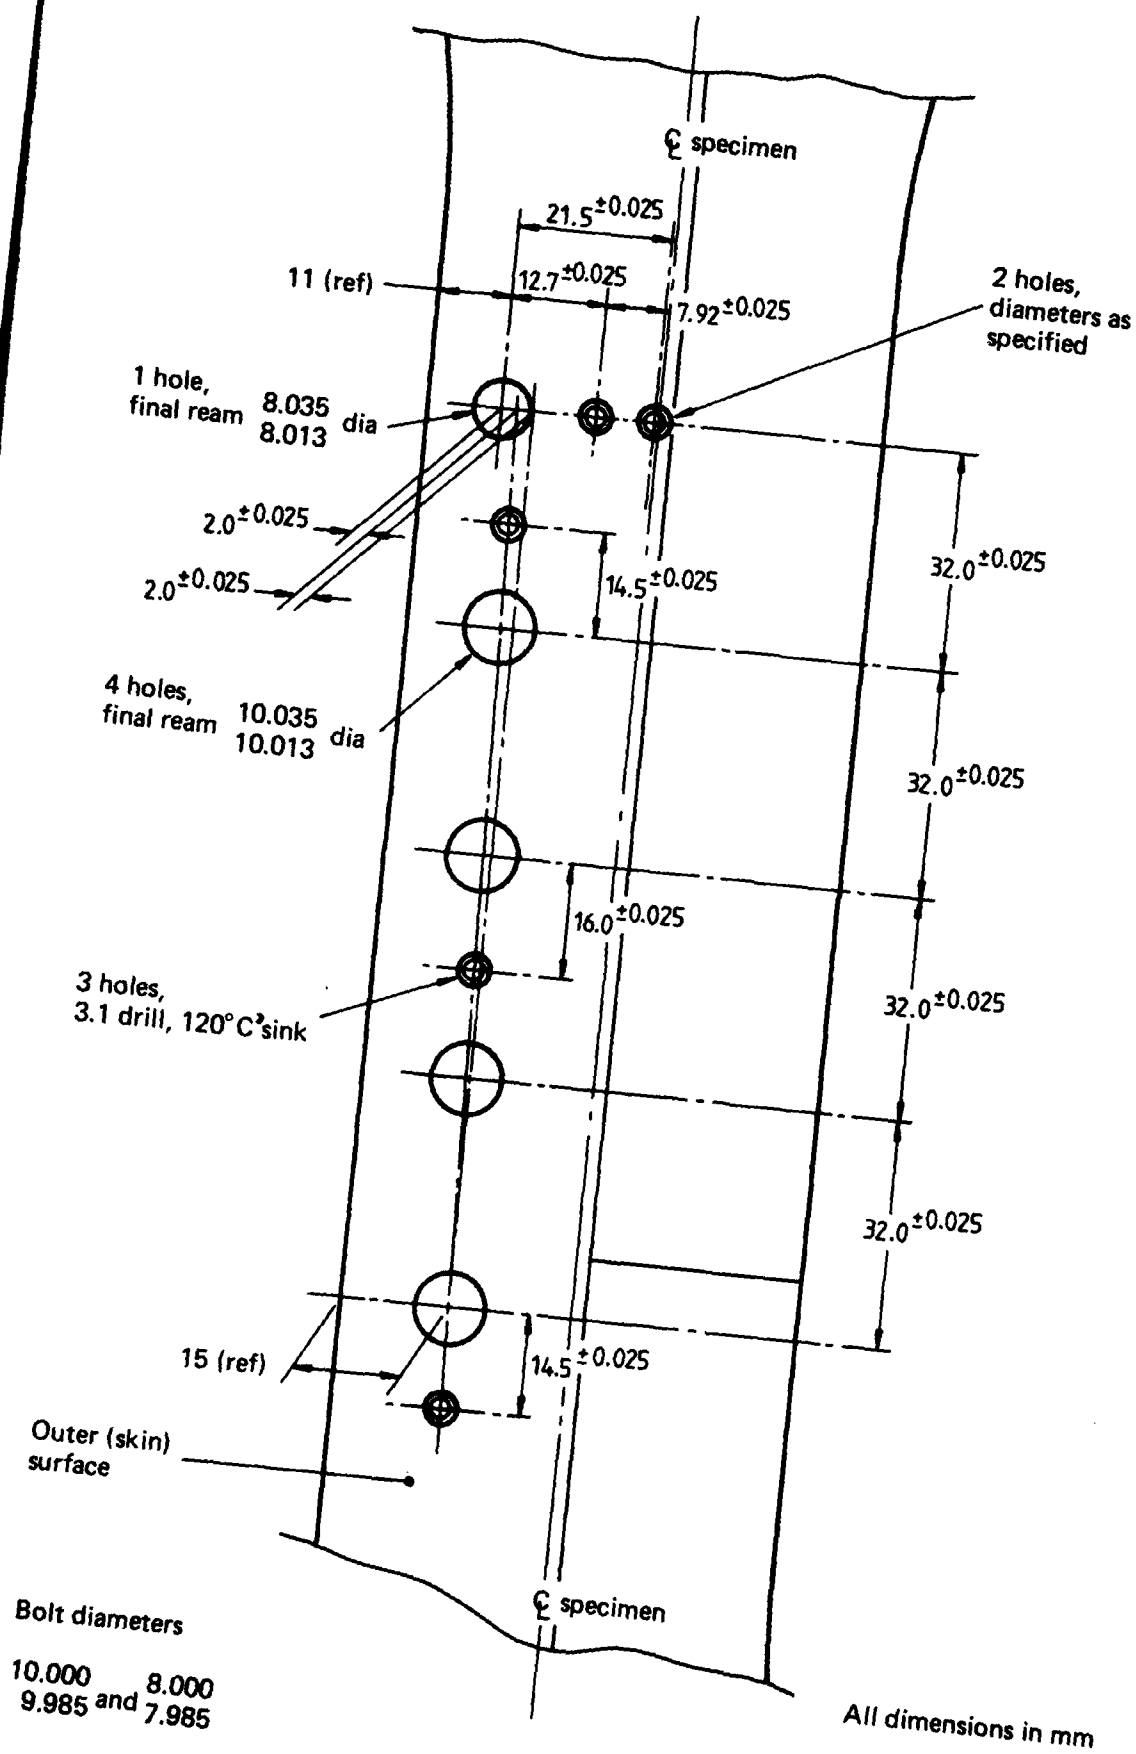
RIVET AND BOLT HOLES AT TEST SECTION OF SPECIMEN
